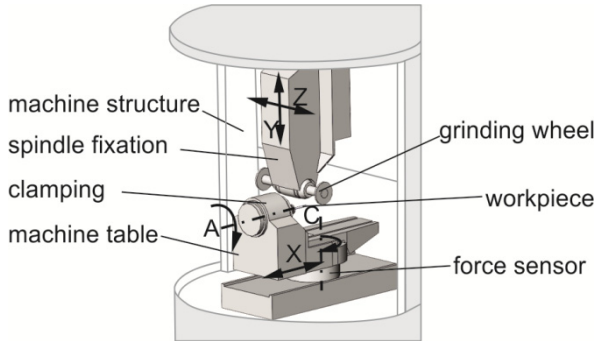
Axis configuration of the used 5-axis CNC tool grinding machine (Walter Helitronic Power)
